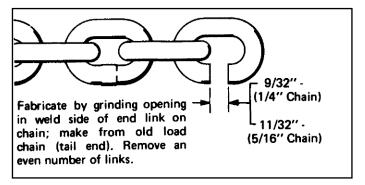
Open "C" Link for Removing and Installing Coil Load Chain
